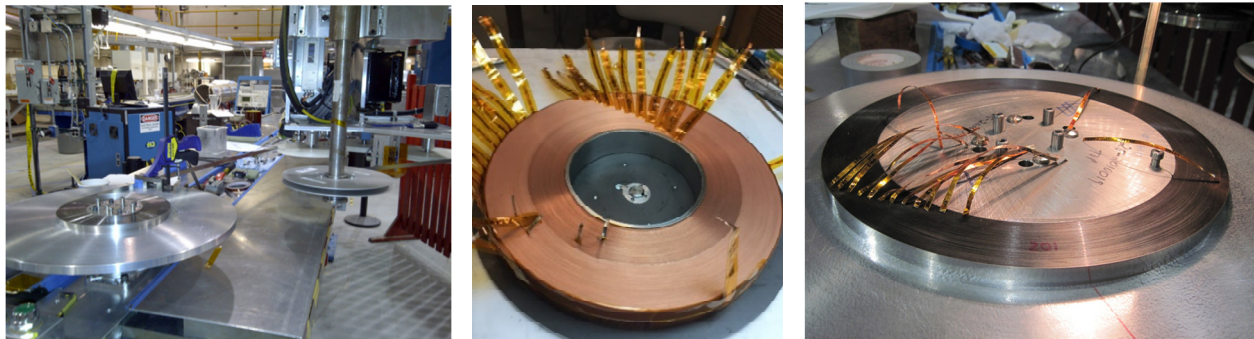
c. Left: Winding machine. Center: 971-turn pancake of 100 mm I.D., 220 mm O.D. with 550 m of 12-mm tape. Right: 258-turn pancake with 210 m of 12 mm tape wound on a 220 mm mandrel.
